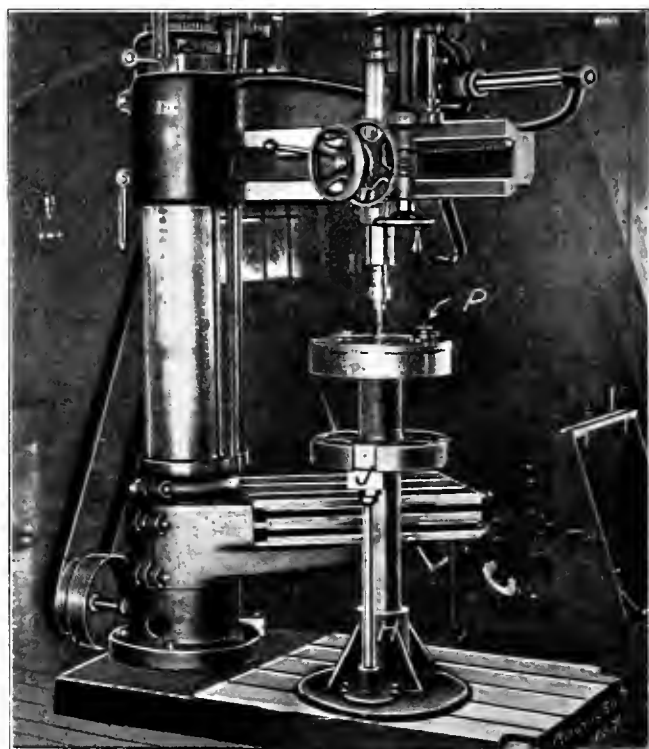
Drilling the Dowel and Screw Holes for the Rotating Lugs.
